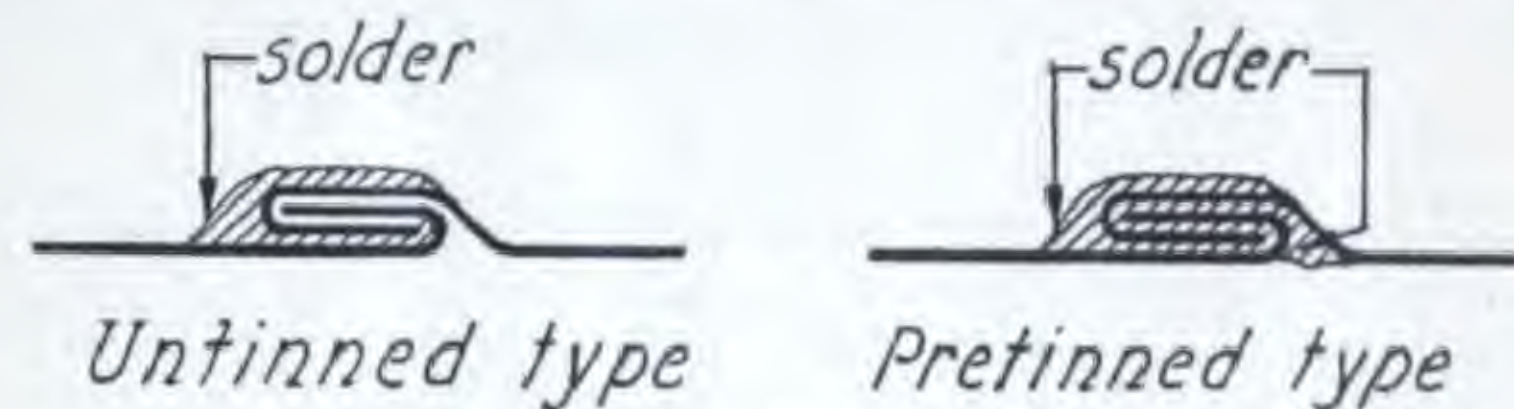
SOLDERED FLAT-LOCK SEAMS
